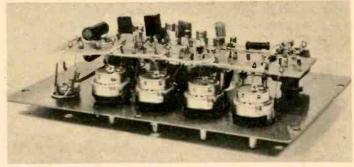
In pictorial, the following parts are mounted on top of board: all transistors, C9, C10,C12,C13,C15,R28 and R31. All other parts are mounted on back of board. Board is mounted on M1's terminals.
